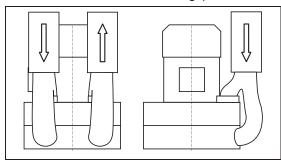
2BH1943 (two-impeller pump-motor unit with double-flow design)
